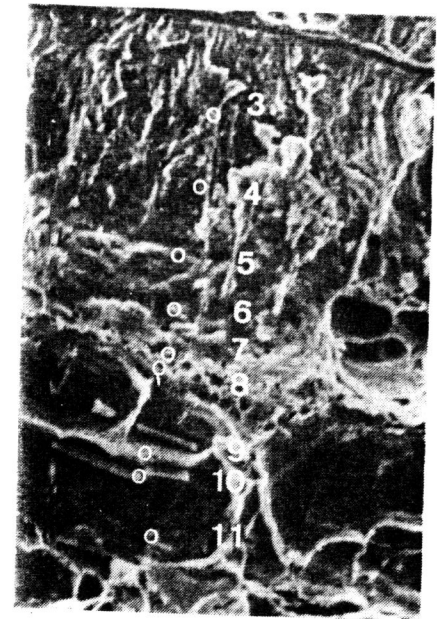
Boundary between fatigue crack and stretched zone on side A of specimen 6
